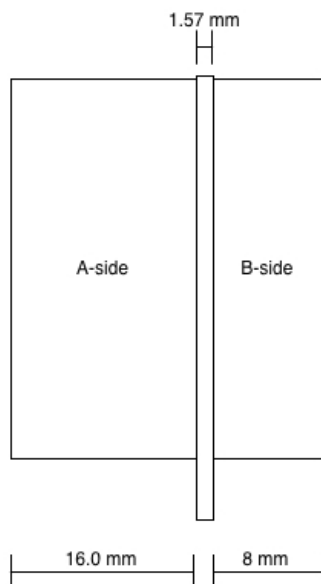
Mechanical Dimensions Component Heights Including Tolerance for Single-width cards
